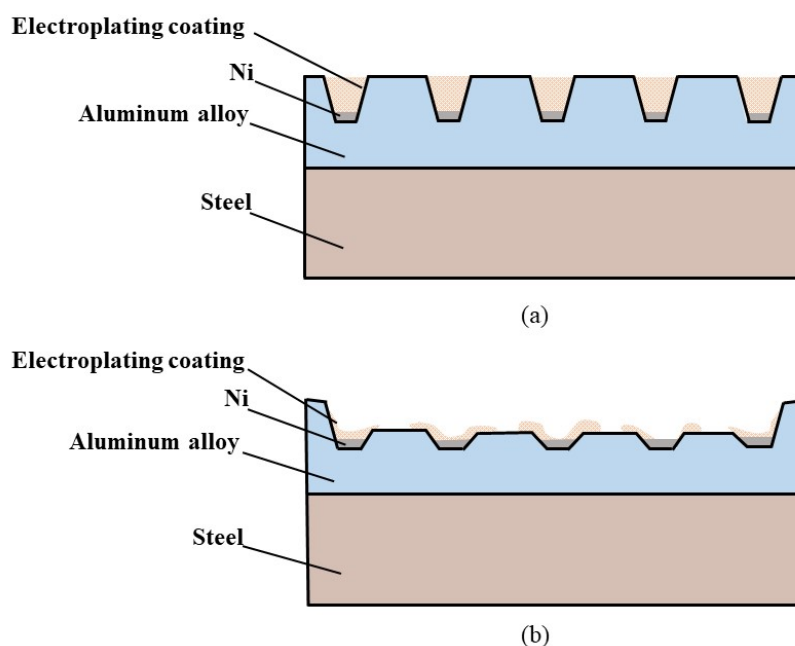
Wear mechanism of the sliding bearing. (a) Original (b) and after wear.
